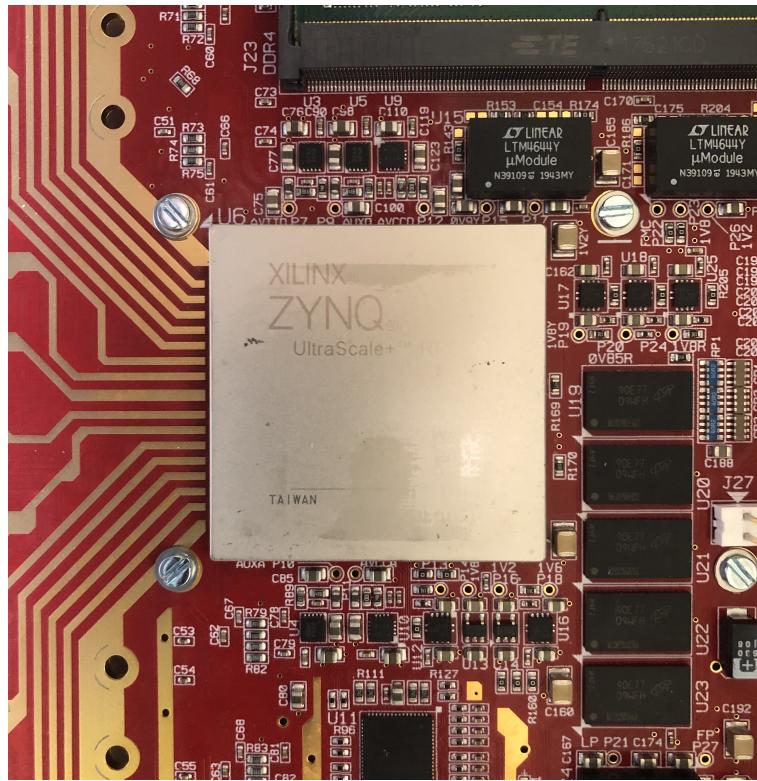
The HTG-ZRF16 Board's FPGA with the HiTech Global Heat Sink Fan Removed
